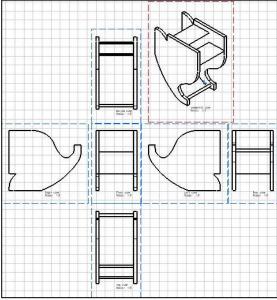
Assembly – Zero Angle of Attack – Different Views
